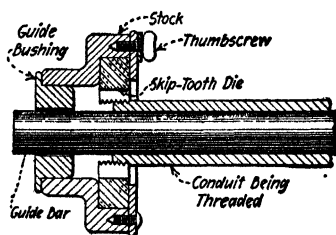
Threading a short nipple with die reversed in stock. Guide bar holds stock and die straight.
